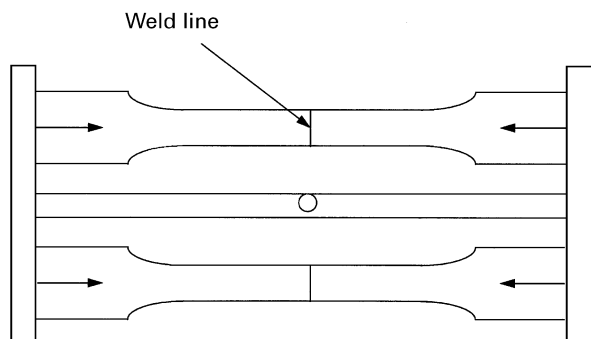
Mould cavity for tensile specimens with a weld line. Arrows show the injection points.
